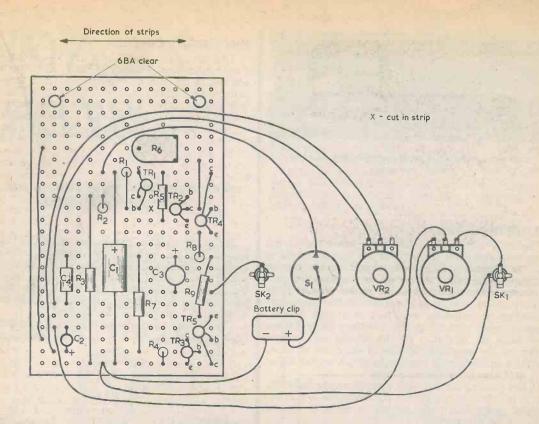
Component assembly on the Veroboard and the wiring to the front panel controls and sockets
